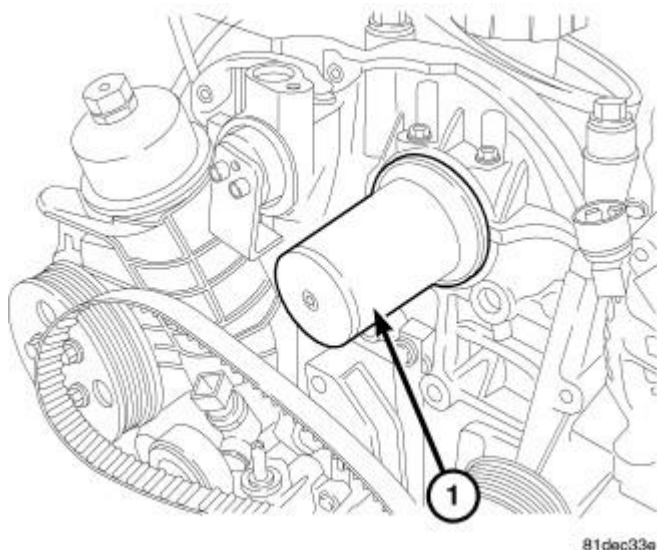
IDENTIFYING SEAL REMOVER HANDLE, SEAL REMOVER & INTAKE CAMSHAFT OIL SEAL
